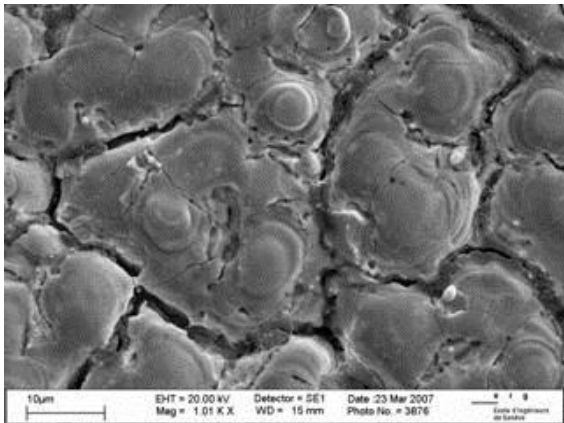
Crazing and cracking on molybdenum. Die sinking EDM
